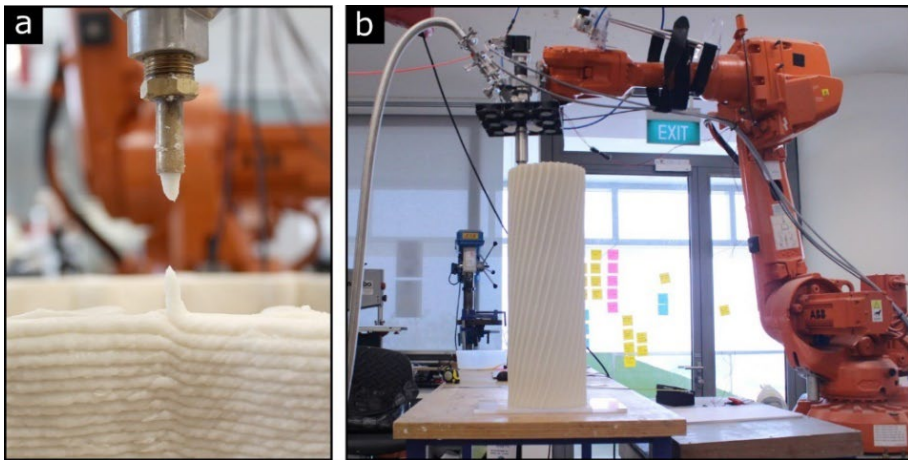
(a) Large-scale FLAM 3D printing using 7mm diameter nozzle. (b) Industrial robot positioner and extrusion dispensing system printing prototype using 1.5mm nozzle
